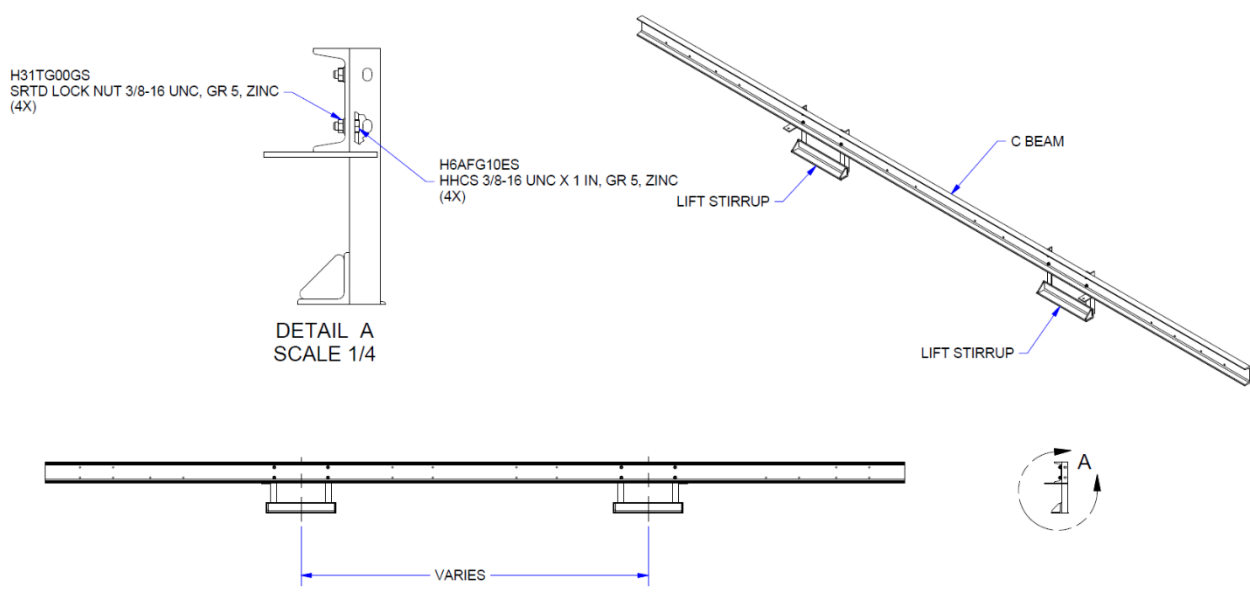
Lift Stirrup Connection to C Beam
